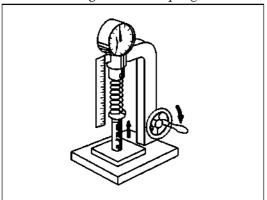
5 - 56 Measure the Pulling Force of the Valve Spring
